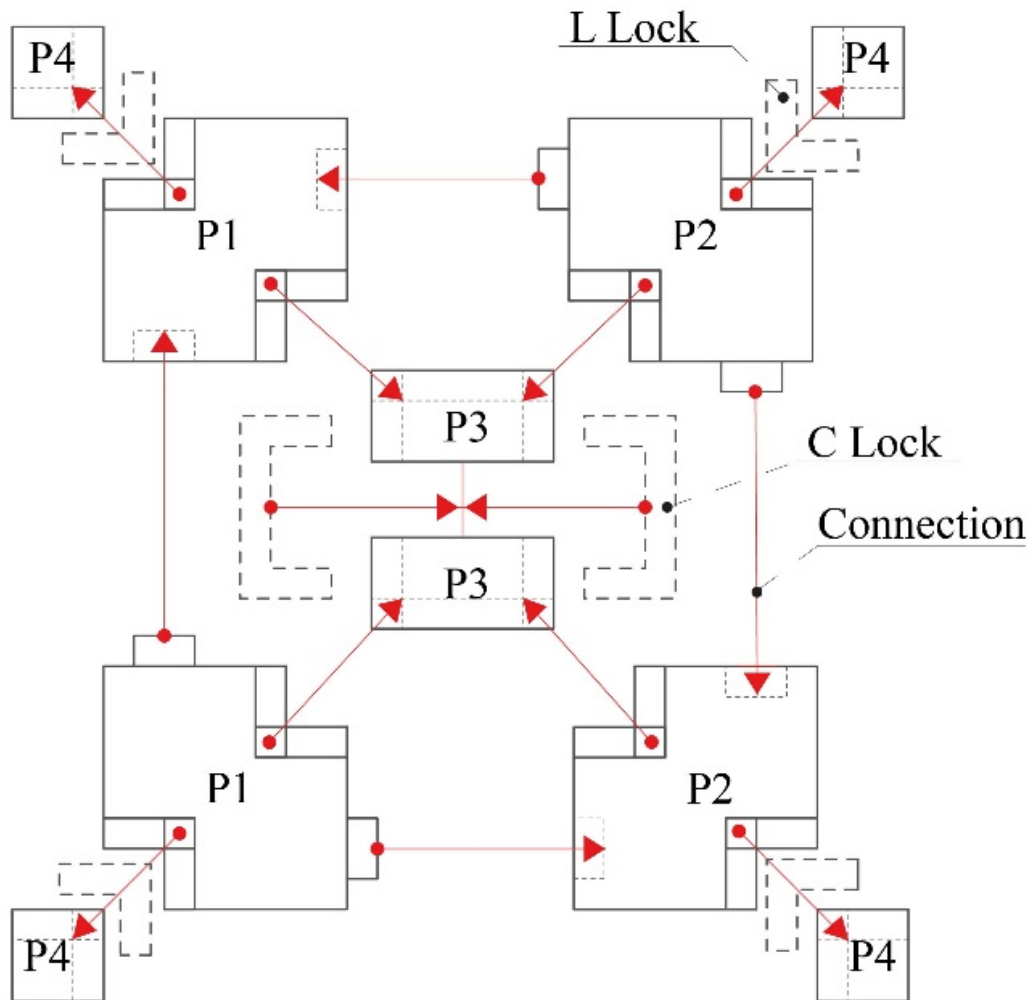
Assembly technique 1 of Prototype A₁ and A₂
